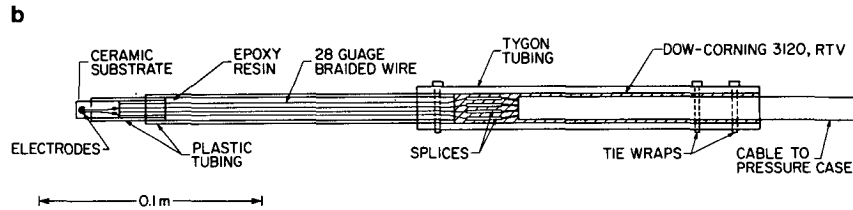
Cutaway view of the microconductivity probe assembly. The cable to the pressure case is enclosed in a hollow probe string.
